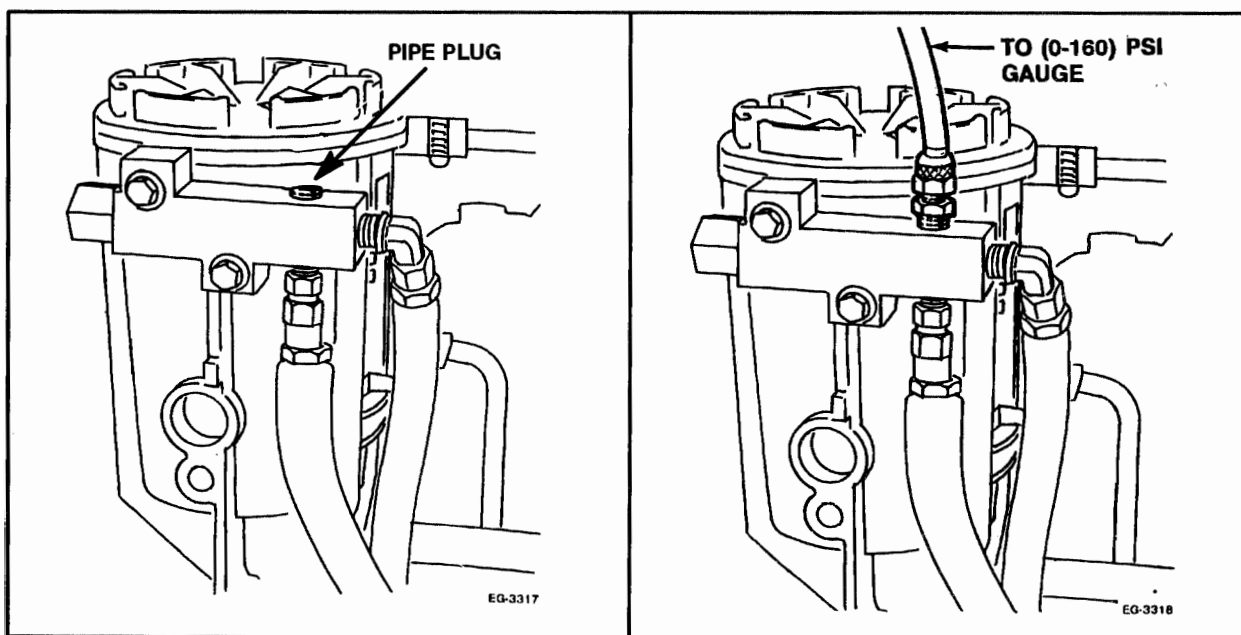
Fuel Transfer Pump Pressure Check
